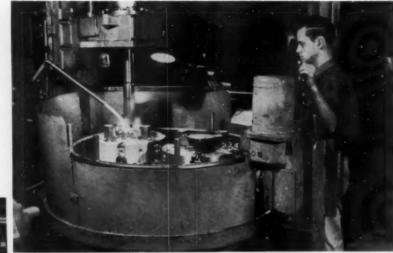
Center holes are drilled in gear blanks in this dual-fixture drill press. Operator can load one blank while the other is machined.
